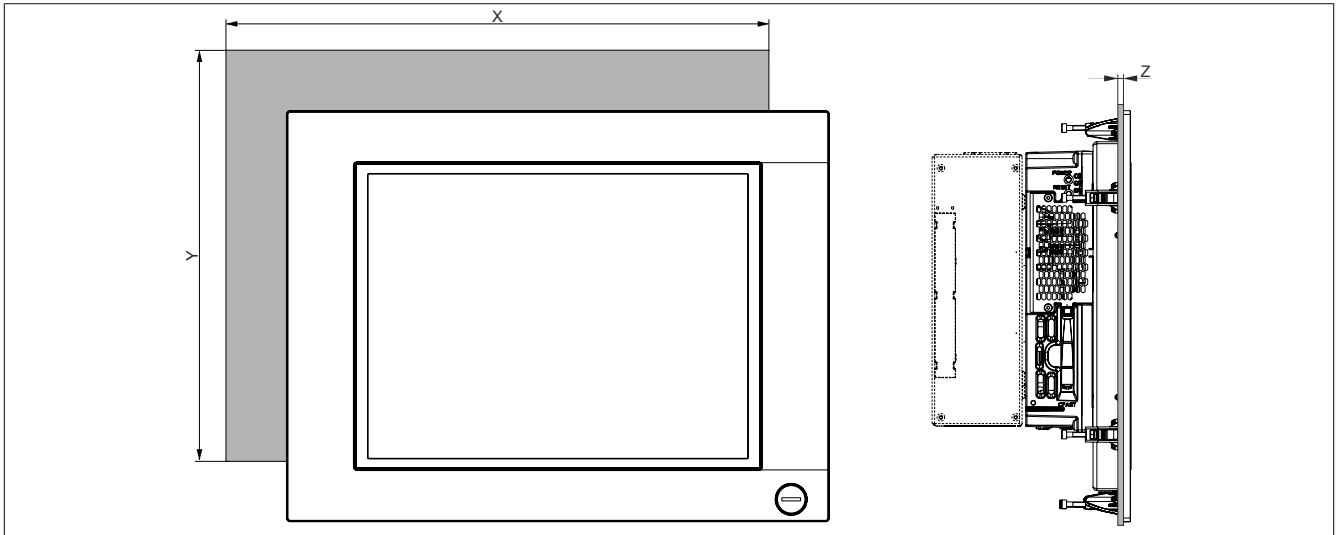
Panel PC 900 with AP1000 display units with retaining clips - Clamping blocks
